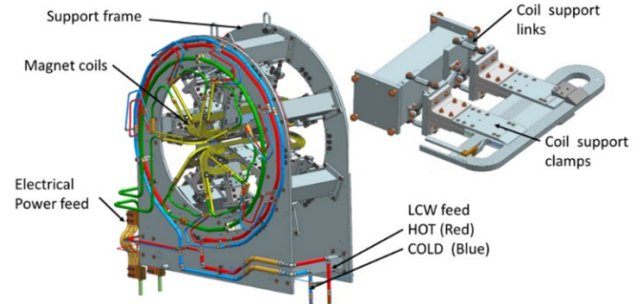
Magnet assembly and Magnet coil on a beam with adjustment linkages
